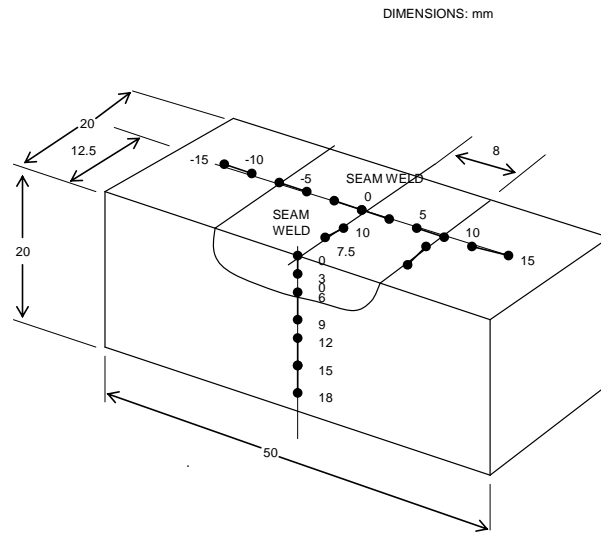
Sample extracted from one weld plate, and electropolished showing the measurement points (dimensions in mm).
